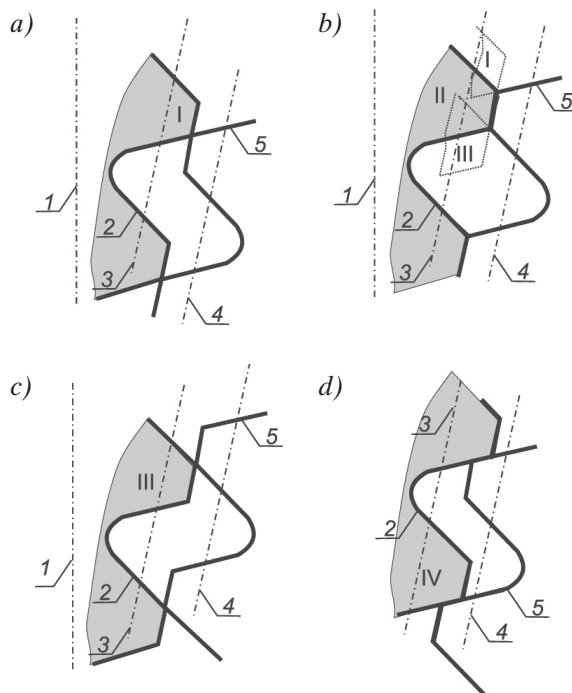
Schemes of initial contact of threads of tapered screw at moment of pin installation into box: 1 – axis of screw thread, 2 – contour of pin thread, 3 – pitch diameter of pin thread, 4 – pitch diameter of box thread, 5 – contour of box thread
